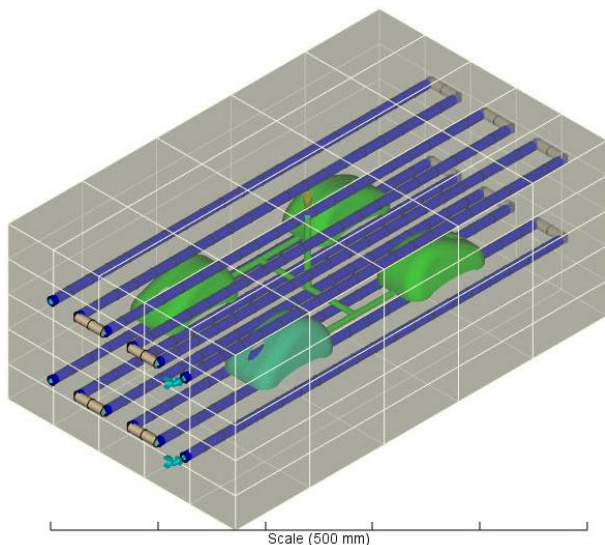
Mouse cover parts, runner system, cooling channels and mold block that has been created
